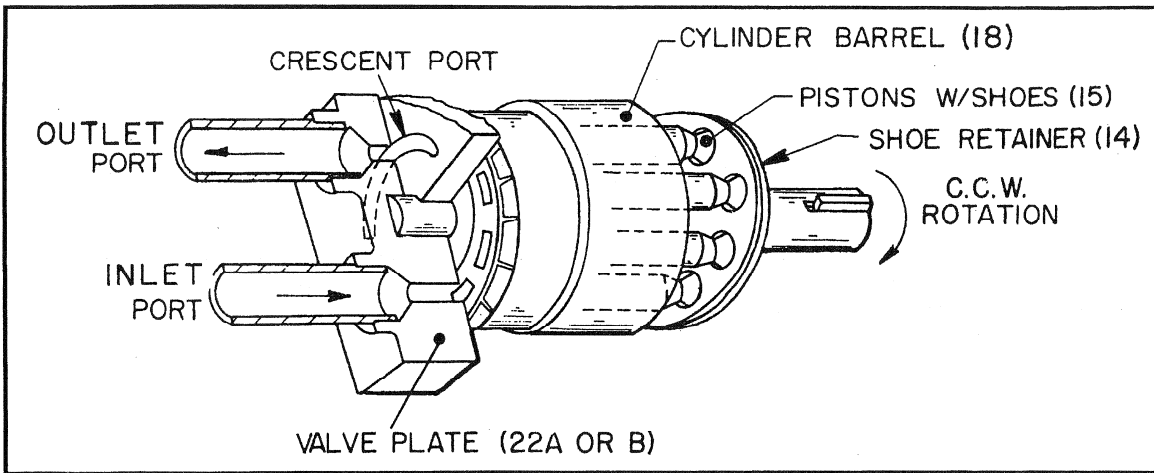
Type "PVWH" Pumping Mechanism (511783).
